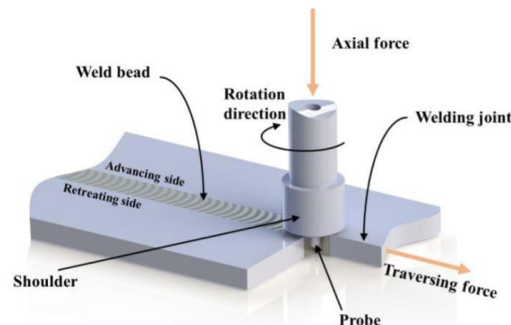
(a) Butt-joint welding procedure by a rotating shoulder.
